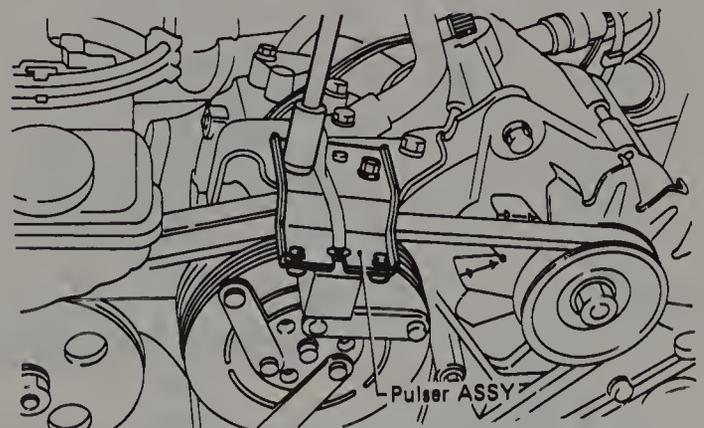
Remove the air conditioning pulser assembly (Sec 5)
